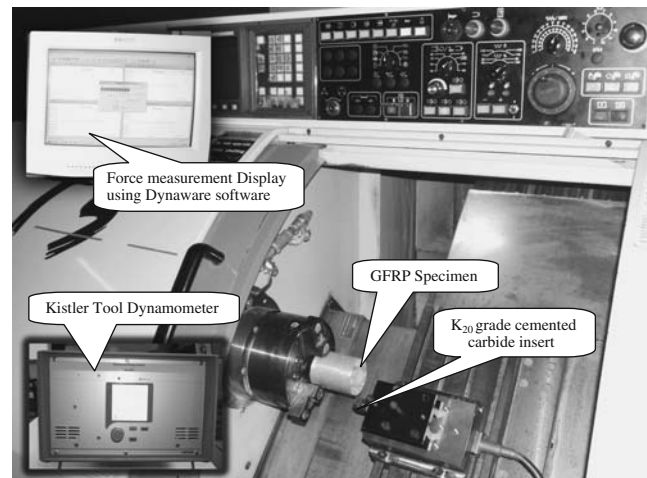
Set up of CNC lathe with the Kistler dynamometer
